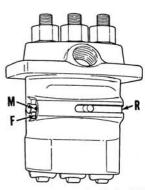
When performing injection limiter adjustment on Model 3HM engine, use fuel stop lever to align center mark (M) of fuel rack (R) with injection pump body reference face (F). See text for adjustment procedure.
